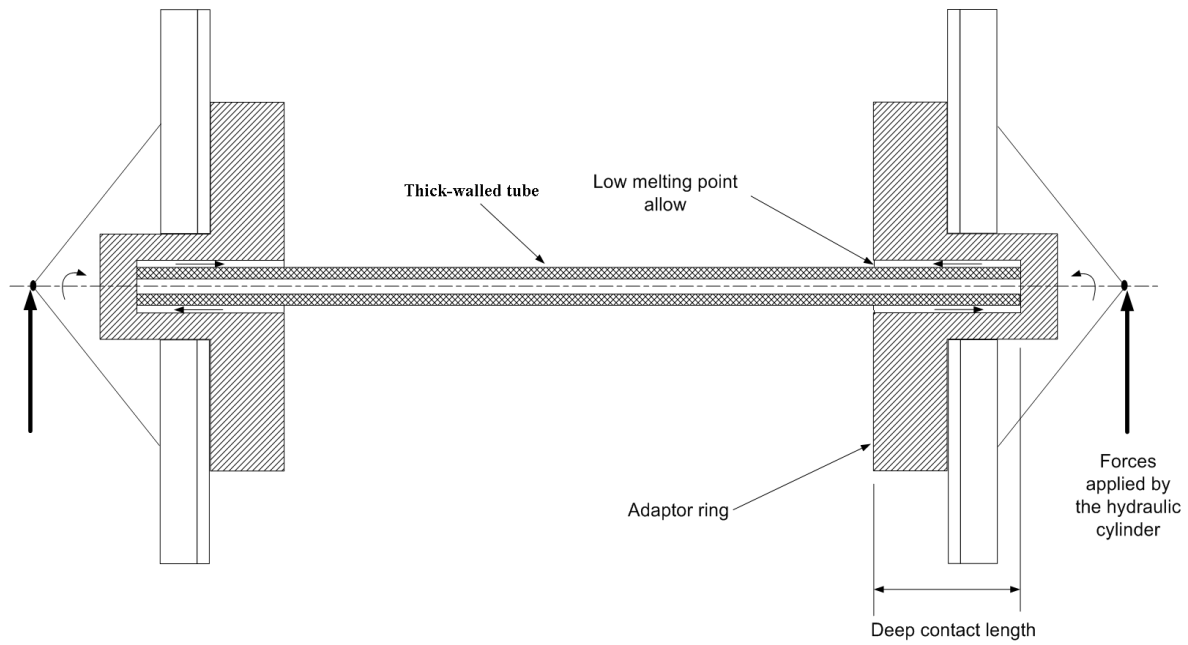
Idea of fixing thick-walled tubes in the pure bending test setup
